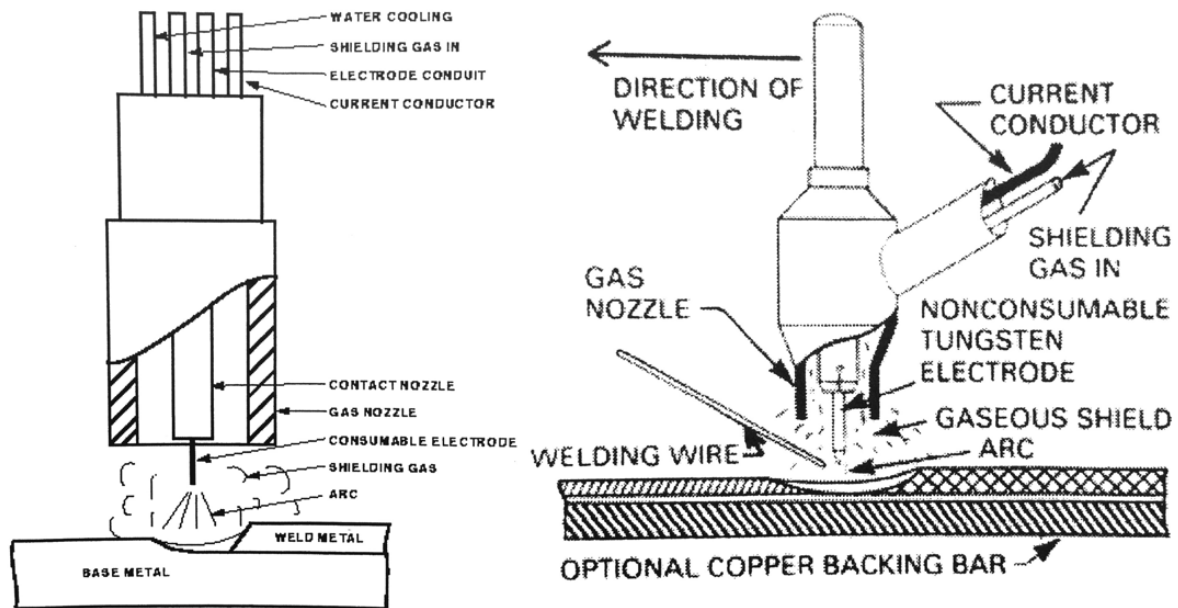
MIG (left) and TIG (right) welding [27].
